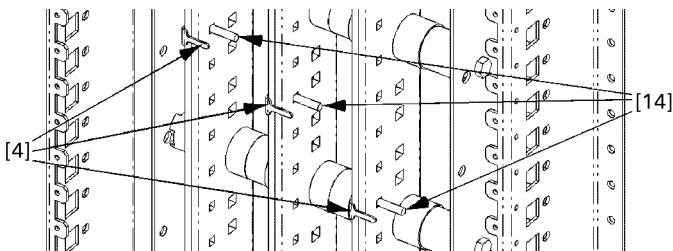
Carriage bolt and antiturn clip installation for three-phase connections, isometric view.
